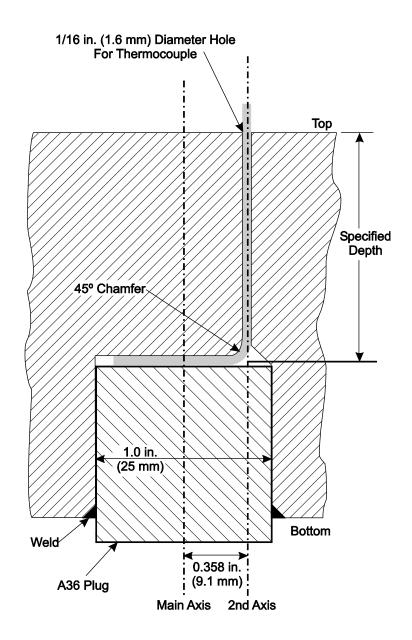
Detail of Embedded Thermocouple for Spray Cooling Test
